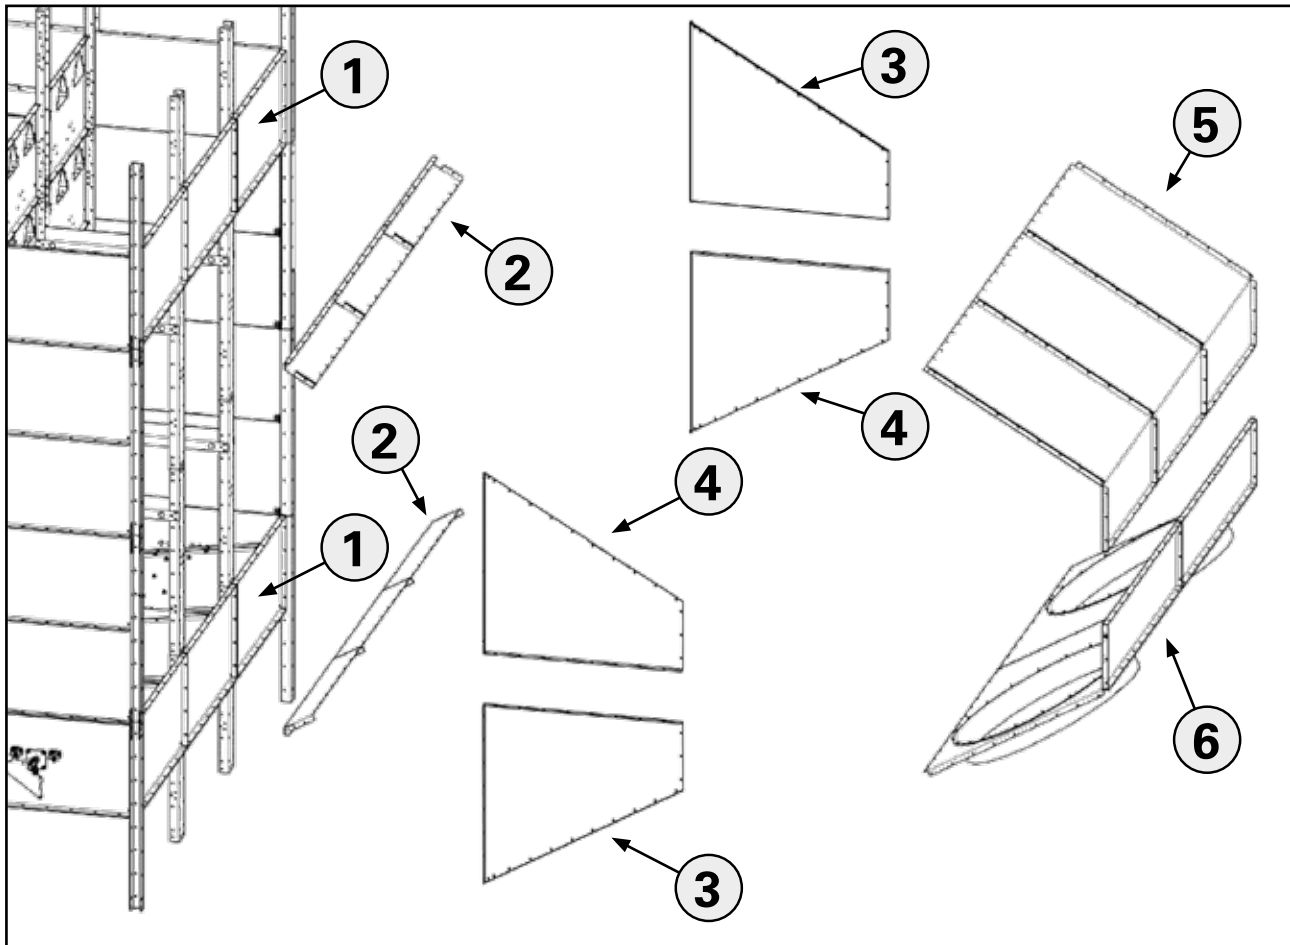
Exploded view of the air casing with air Intake / output attached
